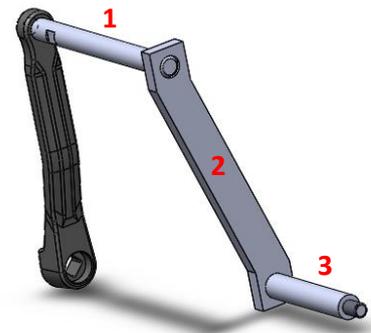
The crank used in the prototype. All four parts are welded onto each other.
